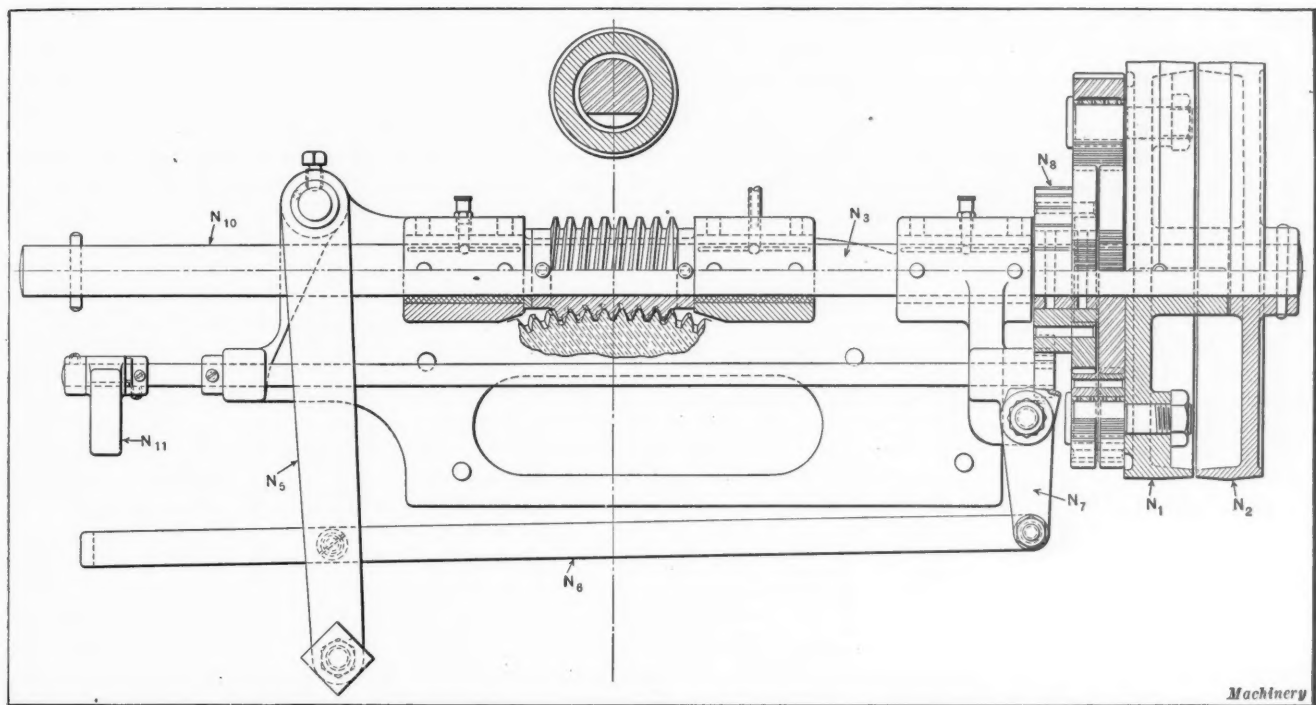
Sectional View through Power Feed Bracket, showing Differential Gear Mechanism and Indexing Worm and Driving Worm and Worm-wheel
